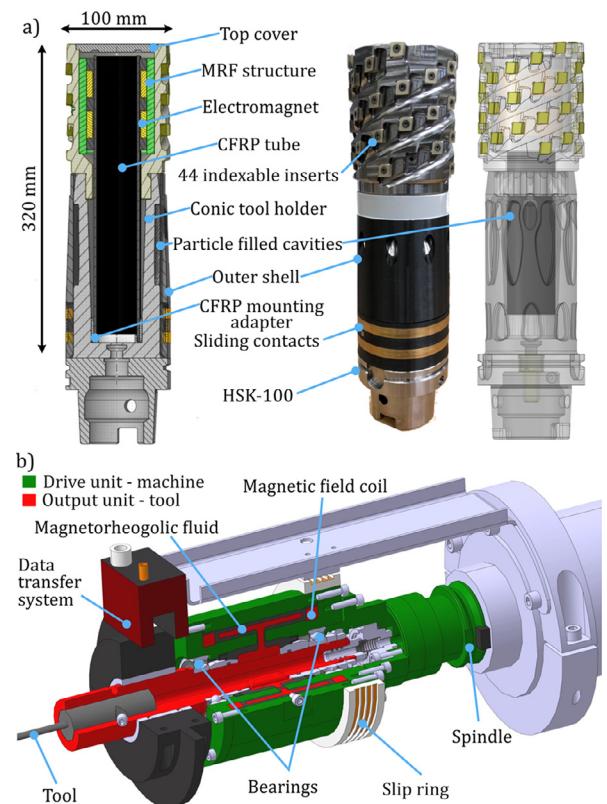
a) Large shell mill with a passive friction damper and an active MRF damper [186], b) Adaptronic tool holder with MRF [282].
